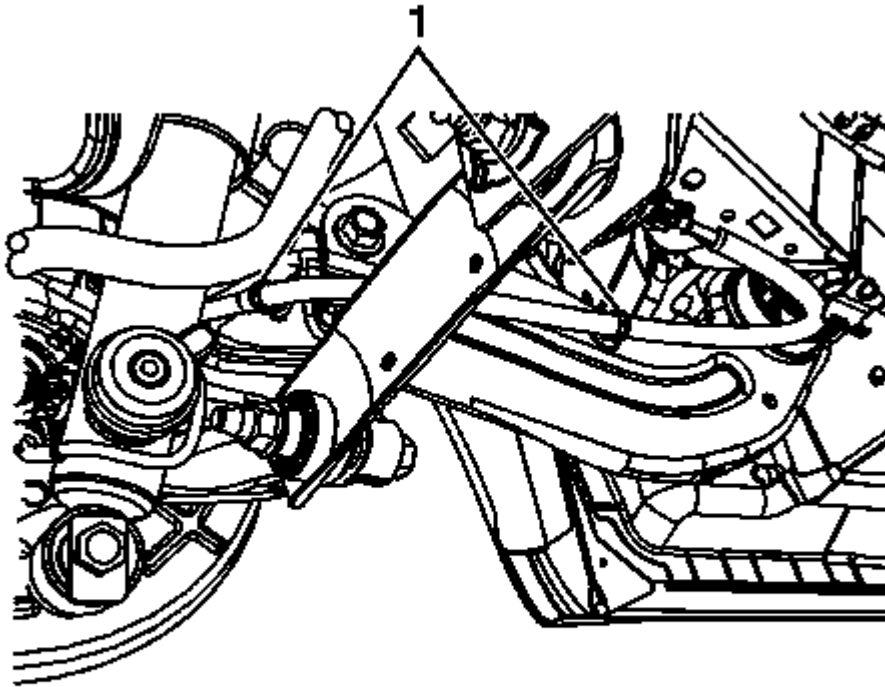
Wheel Speed Sensor Harness Clips And Rear Suspension Bracket
